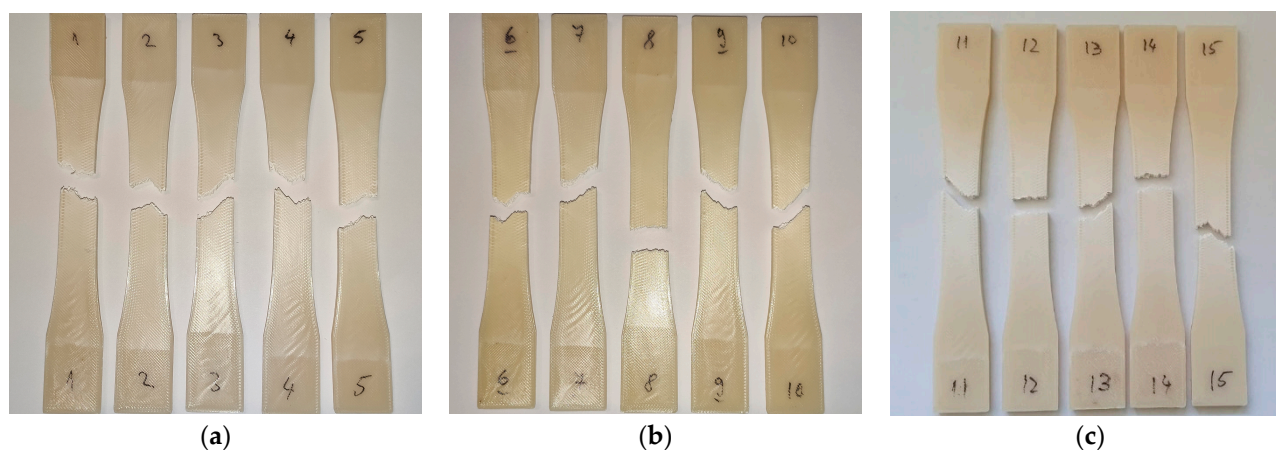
Fracture modes of tensile-tested parts: (a) Fractured ABS-PC parts from the control group; (b) Fractured ABS-PC parts exposed to UV-B; (c) Fractured ABS-PC parts exposed to UV-C.
